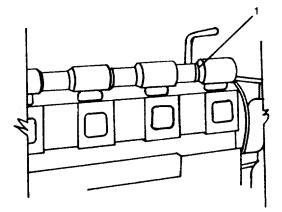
Water Transfer Retaining Ring Removal.
